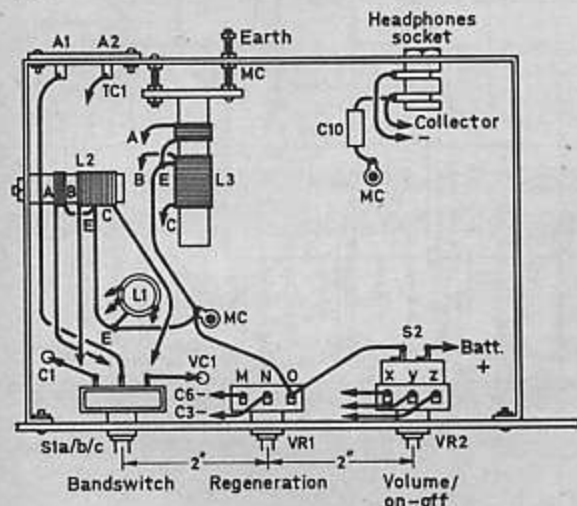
Bottom view of chassis and wiring of coils and controls.
